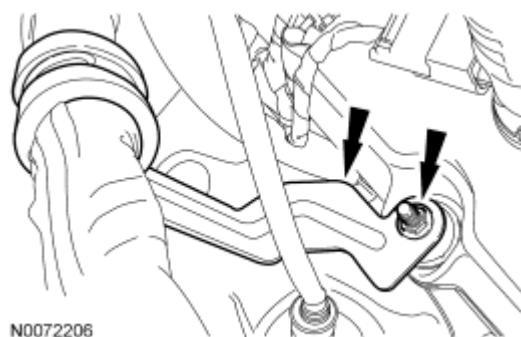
Identifying BoltsCourtesy of FORD MOTOR CO.
